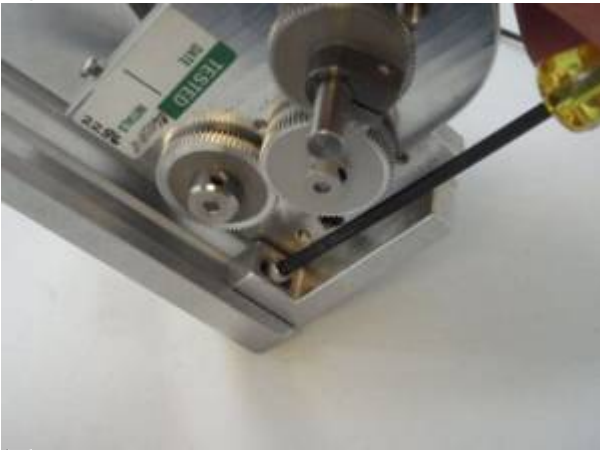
Remove the horizontal adjustment screw so that the Z drive can be removed from the base plate assembly
